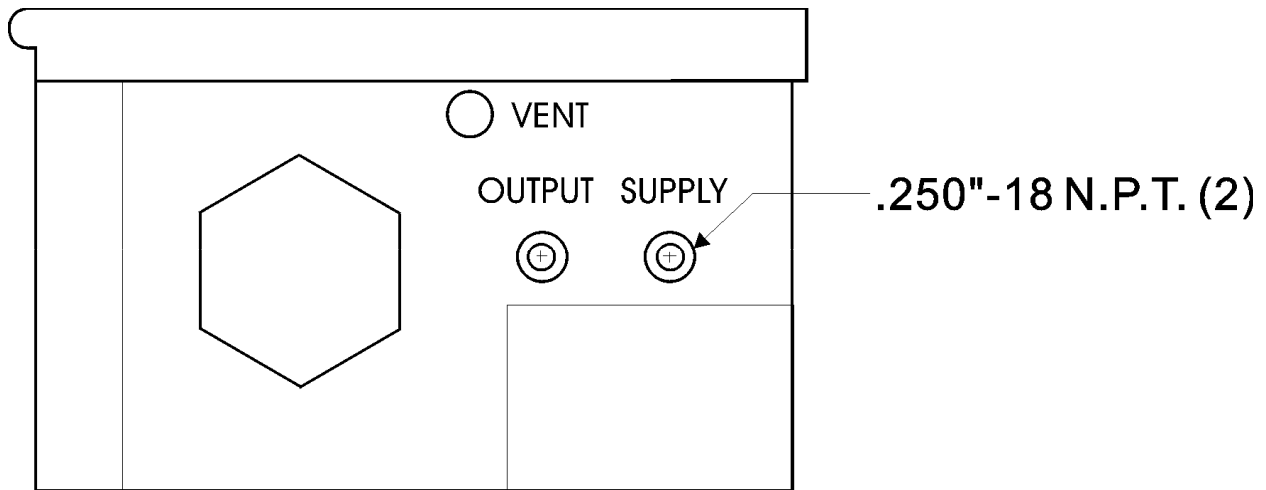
Bottom of Series 5450 Indicating Controller
